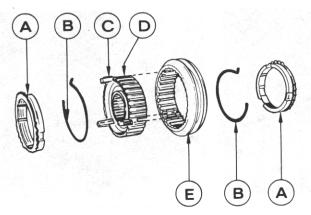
Exploded view of a synchroniser unit (Sec 7)
